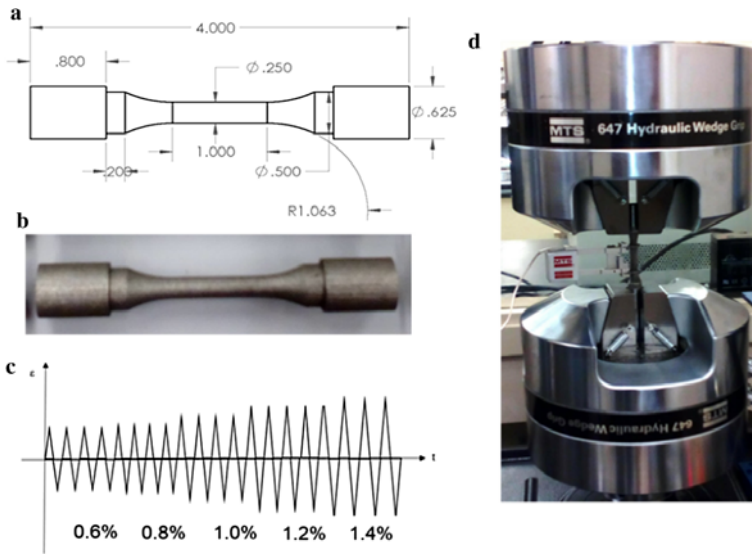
a Sample geometry (dimensions in inches), b as-built DMLS Stainless Steel GP1 prior to machining gripping section, c proportional amplitude fatigue test sequence, d experimental setup [6, 20]. (Color figure online)
